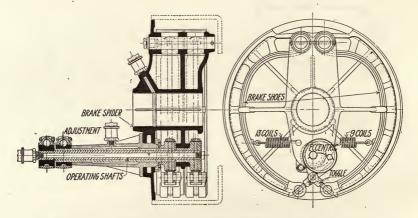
Kelley Internal Expanding Rear Wheel Brake.
